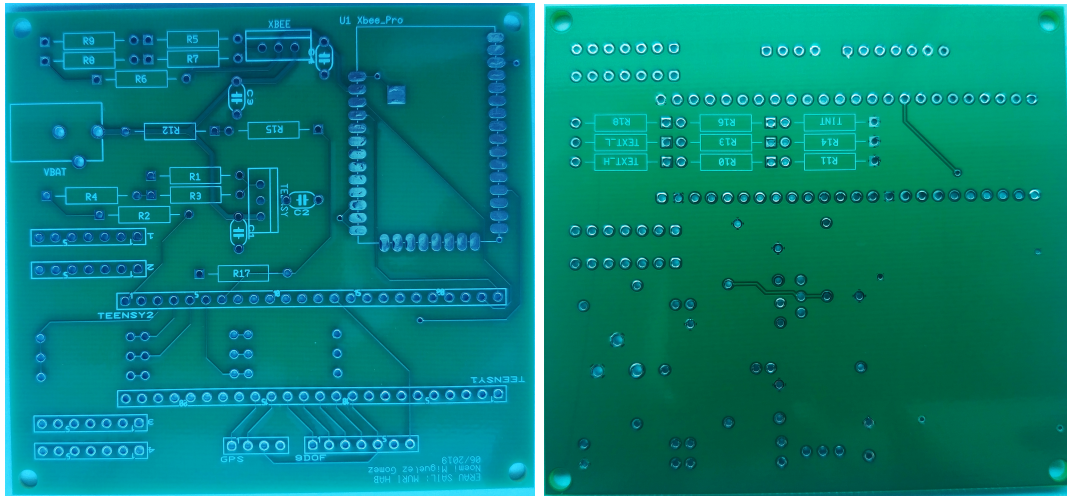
Design 4 - Payload Printed Circuit Board: (L) Top and (R) Bottom Face.
